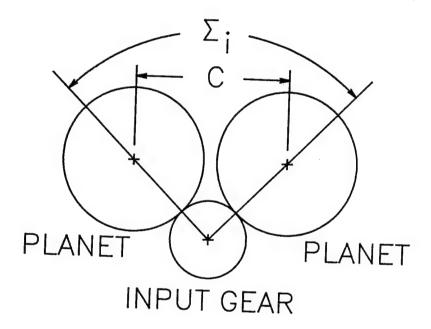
CIRCUMFERENTIAL CLEARANCE GEOMETRY
